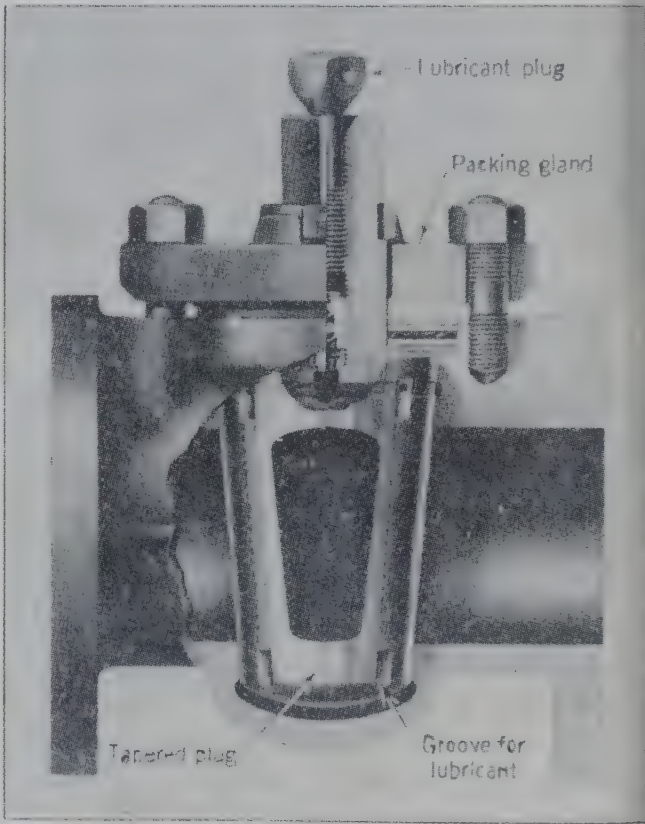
Cutaway view of Plug cock. (Walworth Co.)
